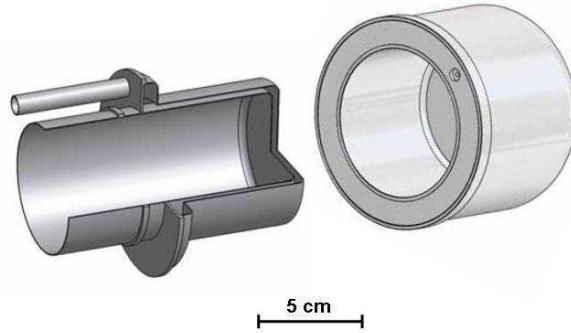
Left: Cut through the installed converter cup at the end of the neutron guide. Right: Aluminium premoderator vessel which fits exactly on the outer diameter of the converter cup.
